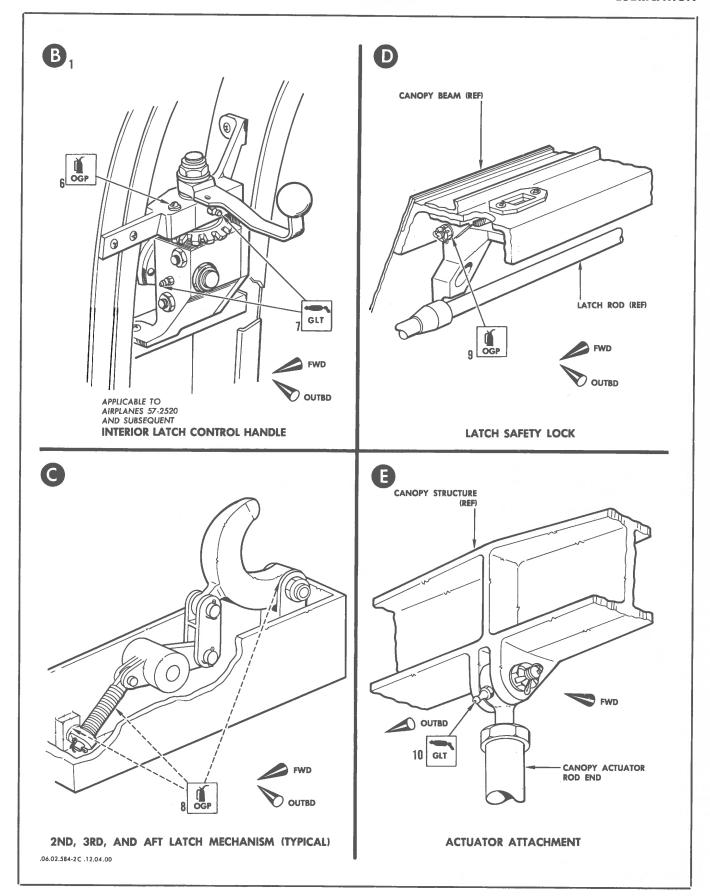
Canopy Components Lubrication, F-106B (Sheet 2 of 3)
